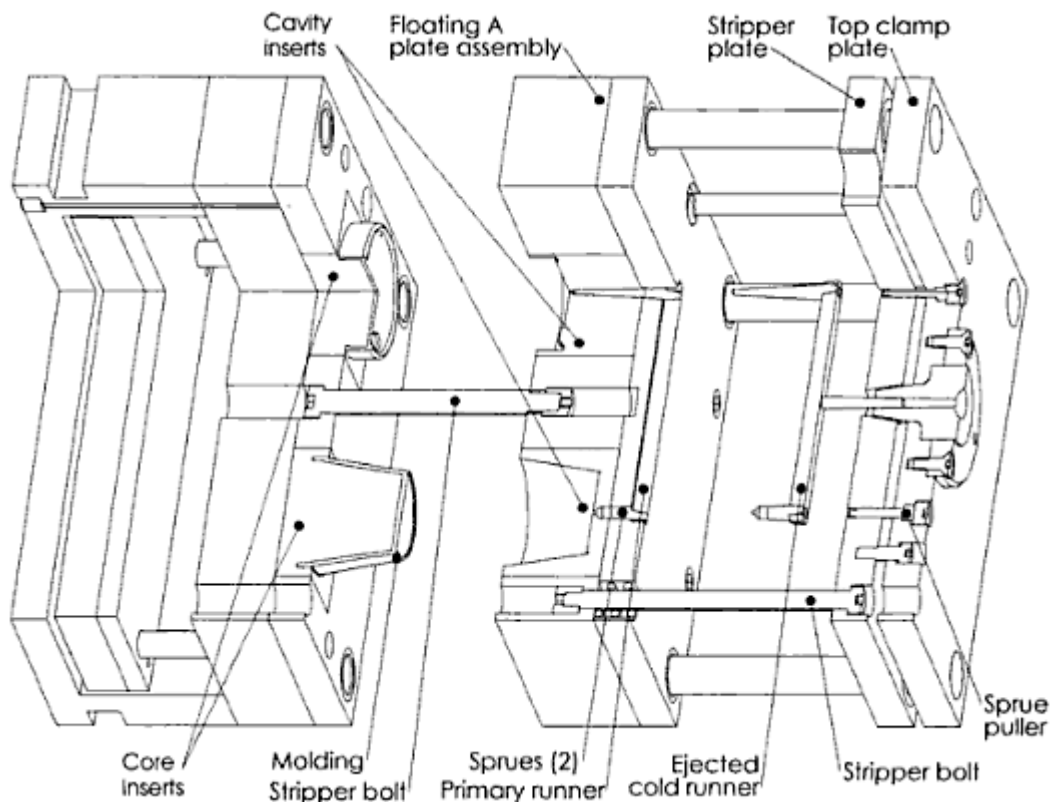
Section of a fully open three-plate mold with the moldings on the core inserts
